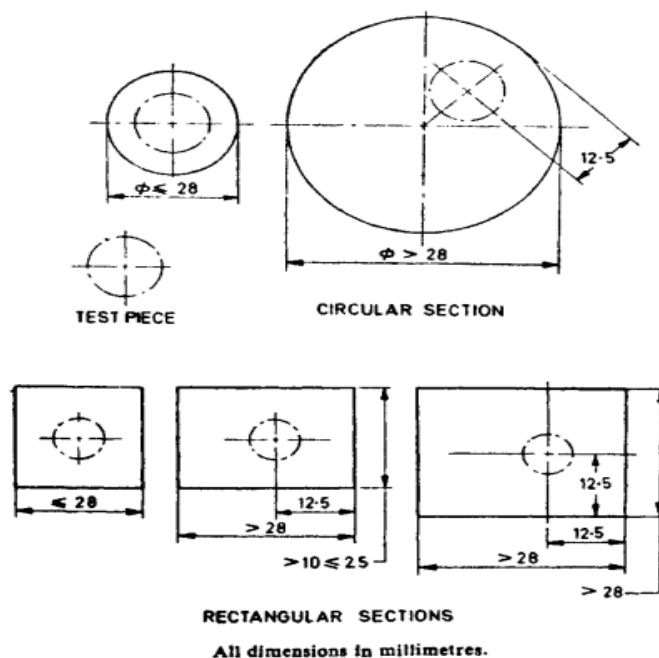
LOCATION OF THE TENSILE TEST PIECES IN THE PRODUCTS
